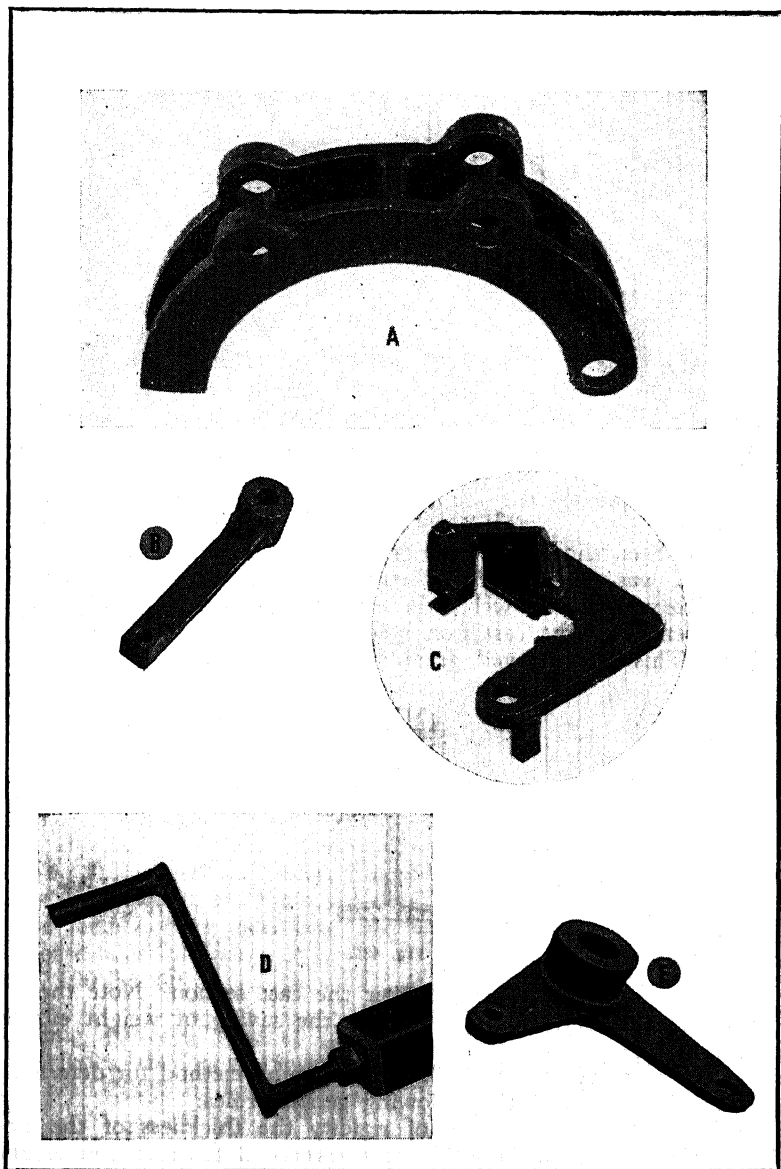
Levers—(A) Chain tightener for mining machine. (B) Lever for mining locomotive. (C) Lever for slabbing machine. (D) Pressure block crank for bending machine. (E) Machine tool lever.
